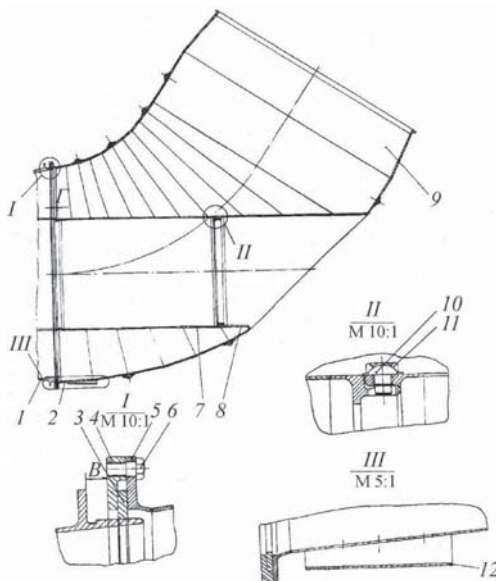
Knee-shaped exhaust device of the D050 engine [15]:
